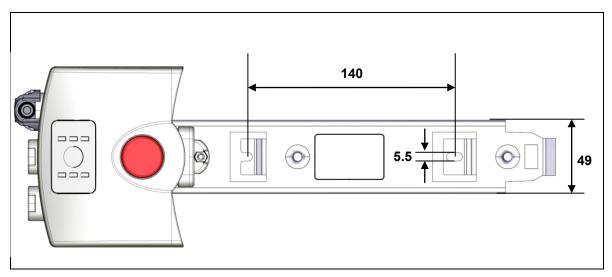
Mounting points on the ACCUCONTROL's mounting rail (in mm)
